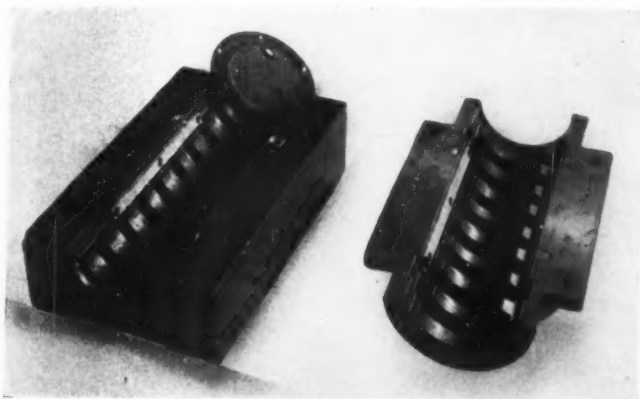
Typical marine type thrust bearings of phenolic plastics for use in a paper mill engine
